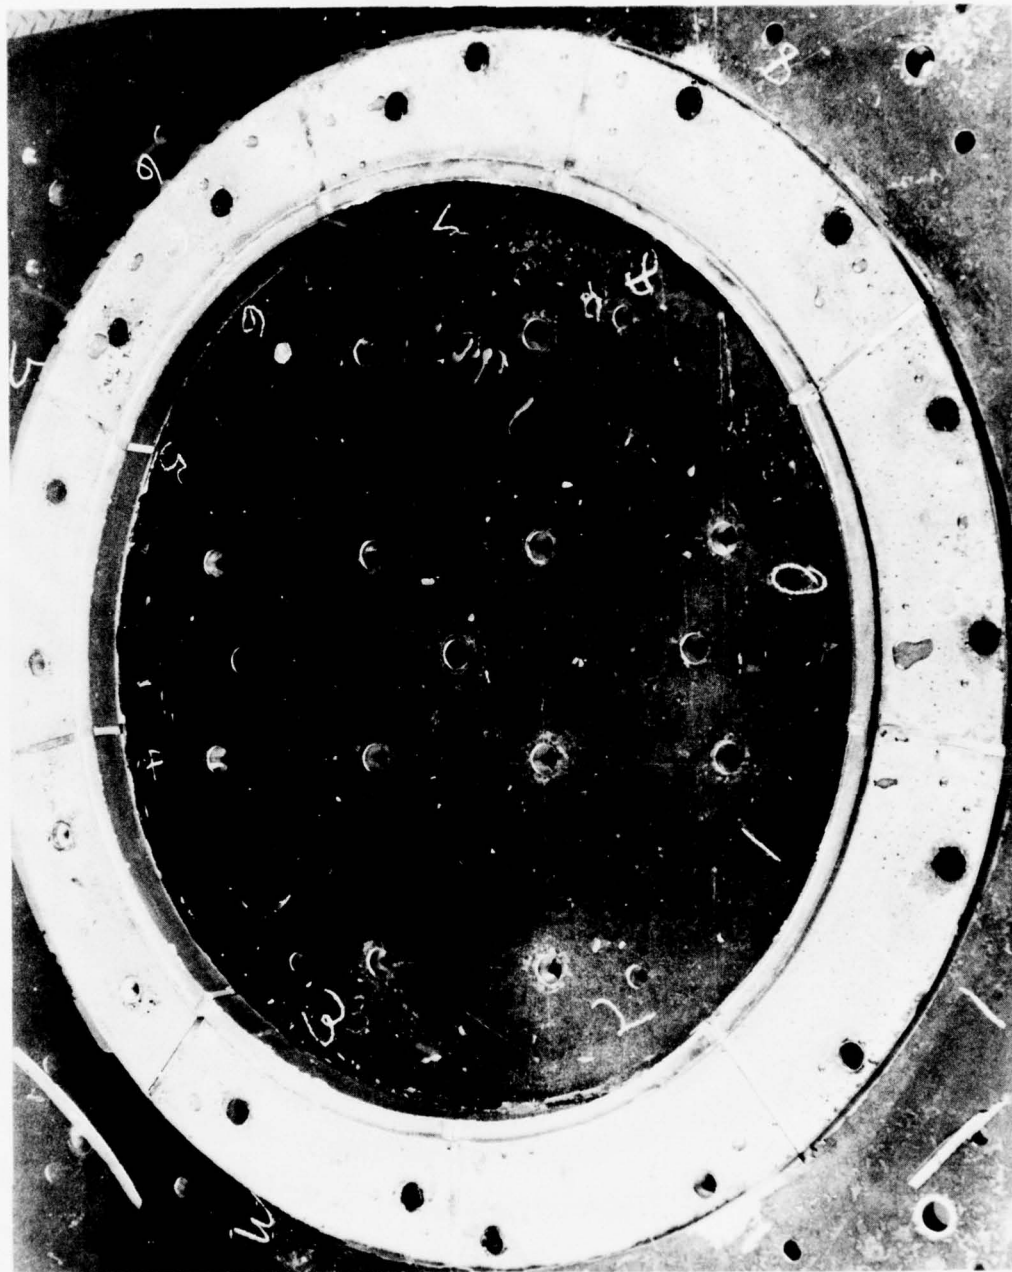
Chock pads of Test Structure No. 2 after removal from the test assembly, before separation
